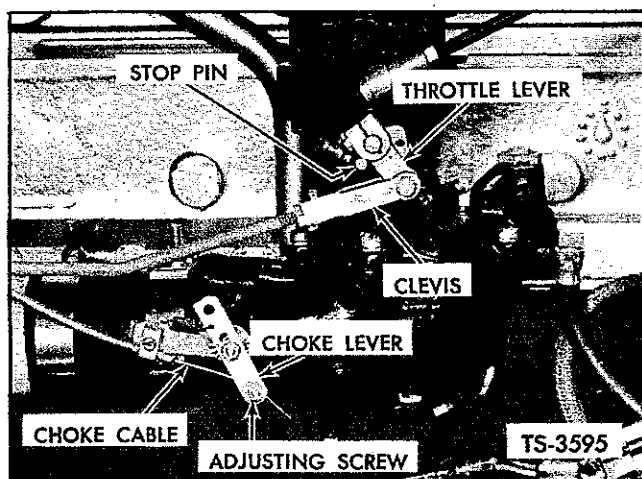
Adjust Throttle and Choke Linkage — Continental Gas
